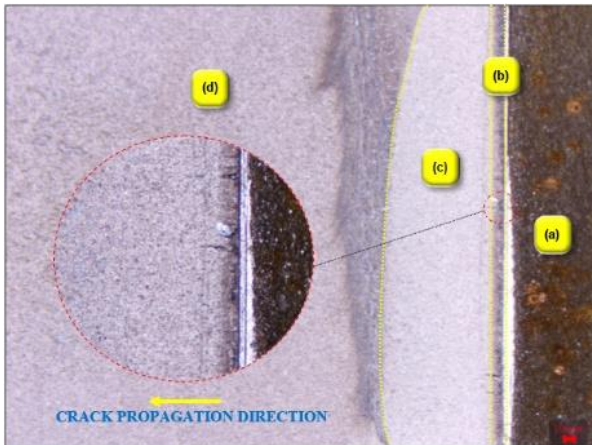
Macro fractography showing fracture surface on stereo microscope: a) notch region; b) compression-compression precracking region; c) crack stabilisation region; d) load reduction region.
